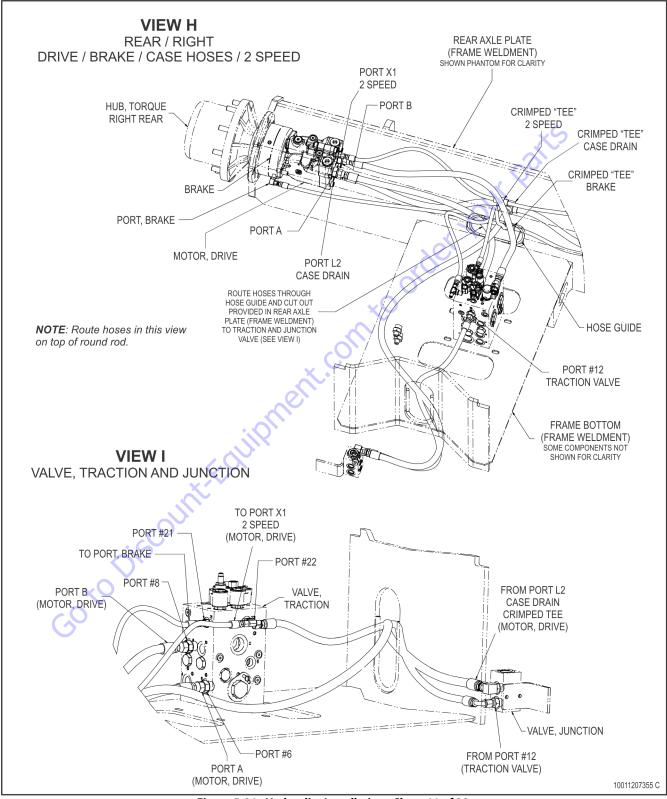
Hydraulics Installation - Sheet 11 of 28
